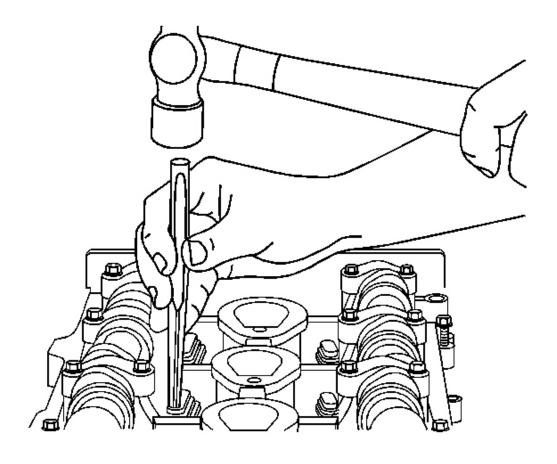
Striking Head Bolts With Hammer Prior To Removal Courtesy of GENERAL MOTORS CORP.
